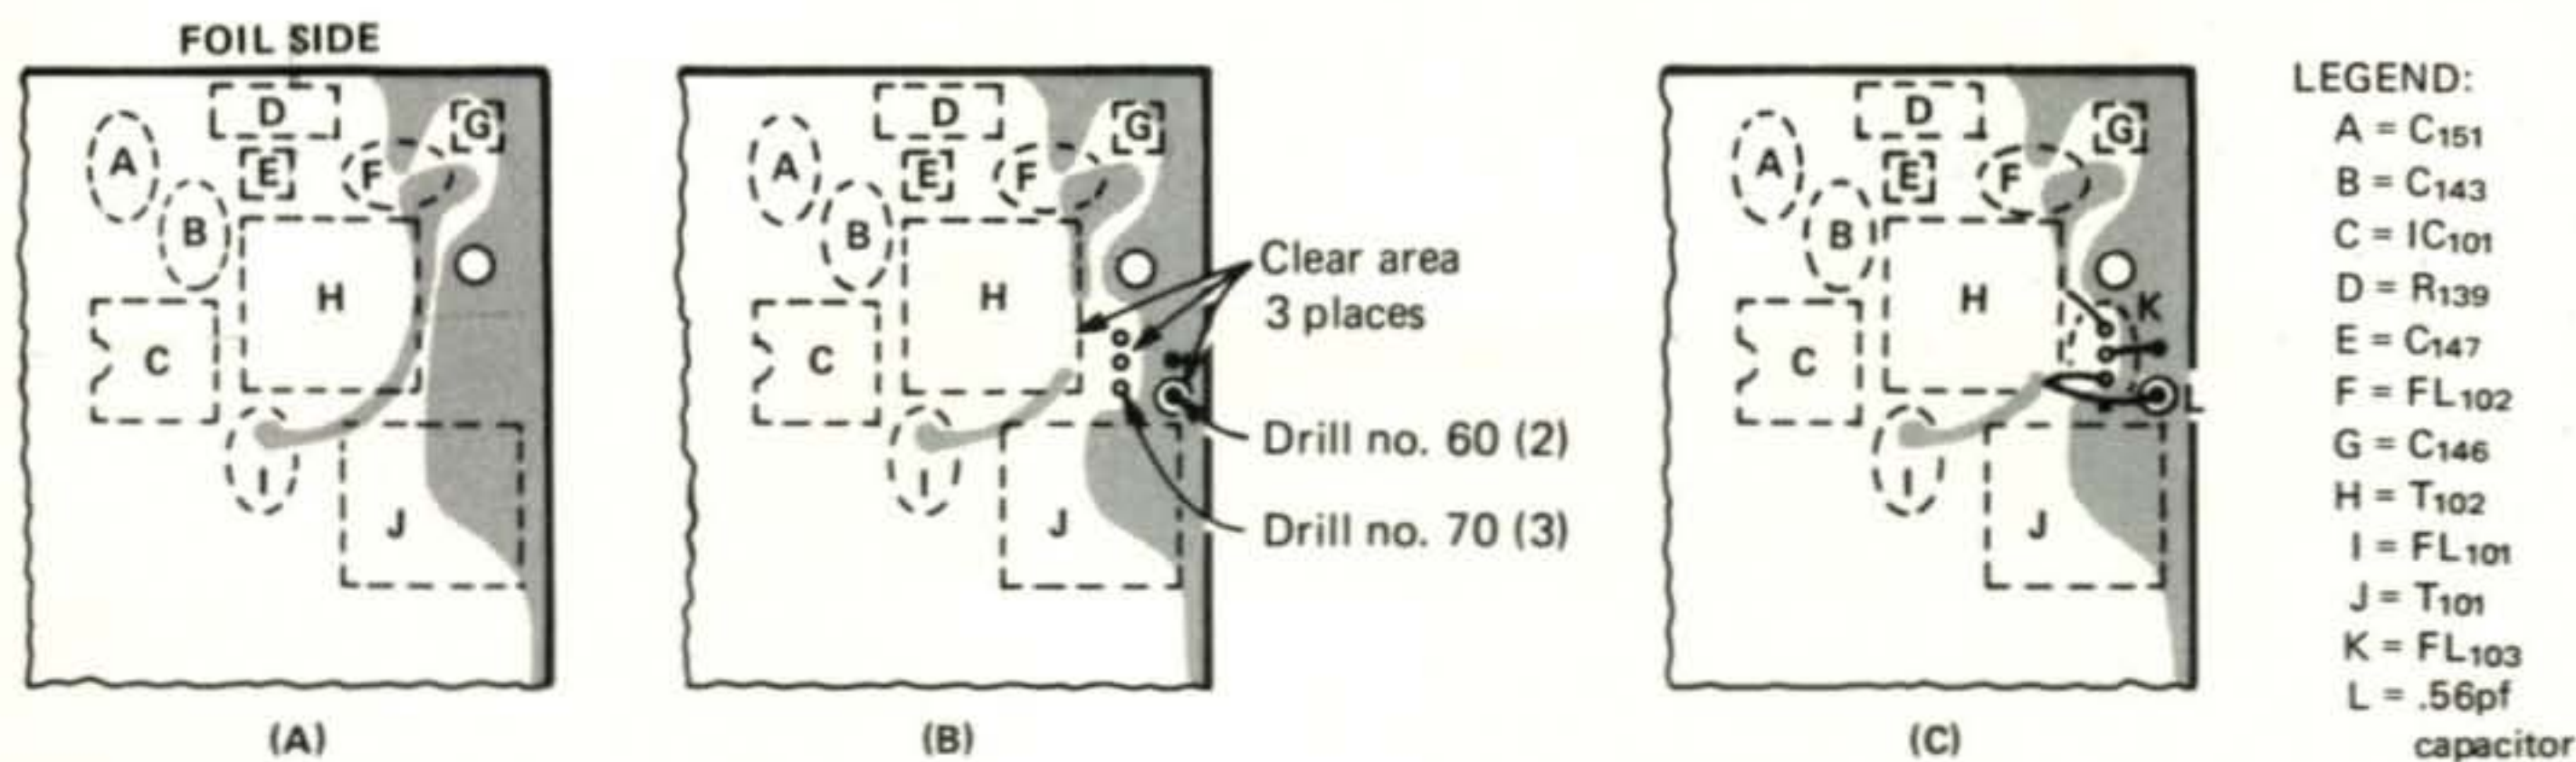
Receiver circuit board shown from foil side. (A) Before modification. (B) Foil is trimmed as shown and new holes drilled. (C) New filter and capacitor are mounted on component side of board and wiring is completed as shown.
